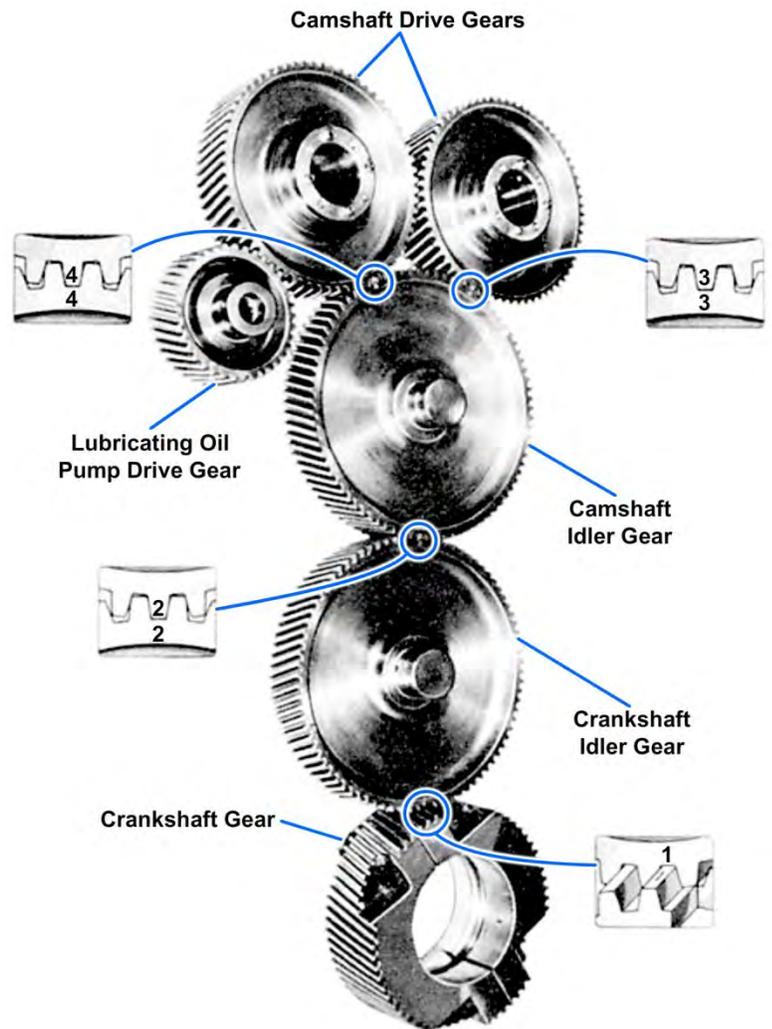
Relative arrangement of the gears in an auxiliary drive mechanism.
